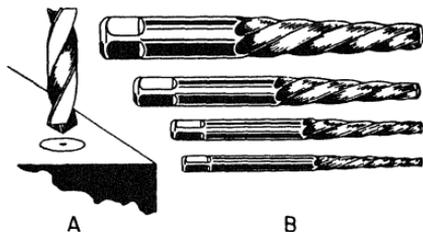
Screw and bolt extractors for removing broken studs.
